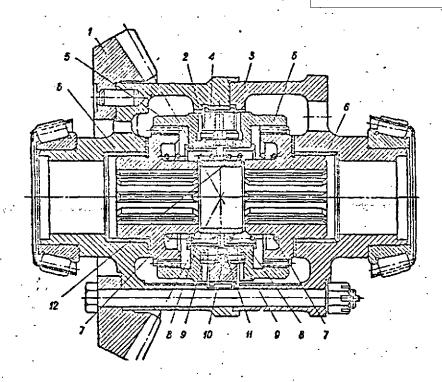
INTERPHEEL DIFFERENTIAL OF REAR REDUCTION UNITS
